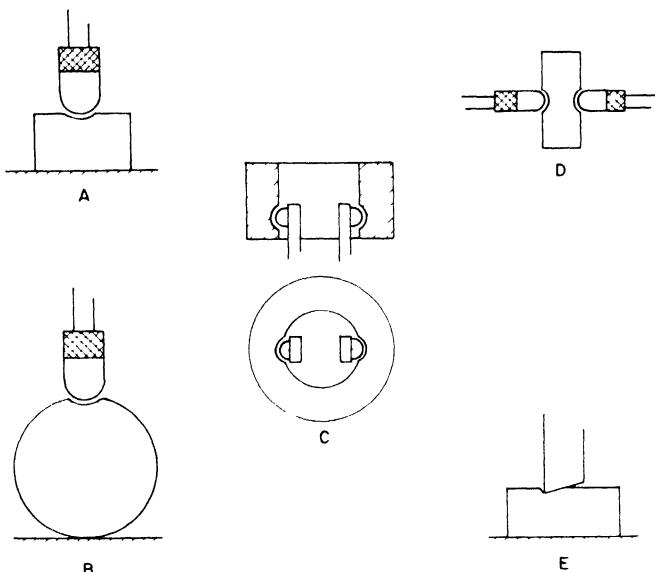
Exaggerated examples of penetration, the deforming of the work-piece surface under the contacting pressure of a gaging point. It is an important factor in millionth-inch measurement.
